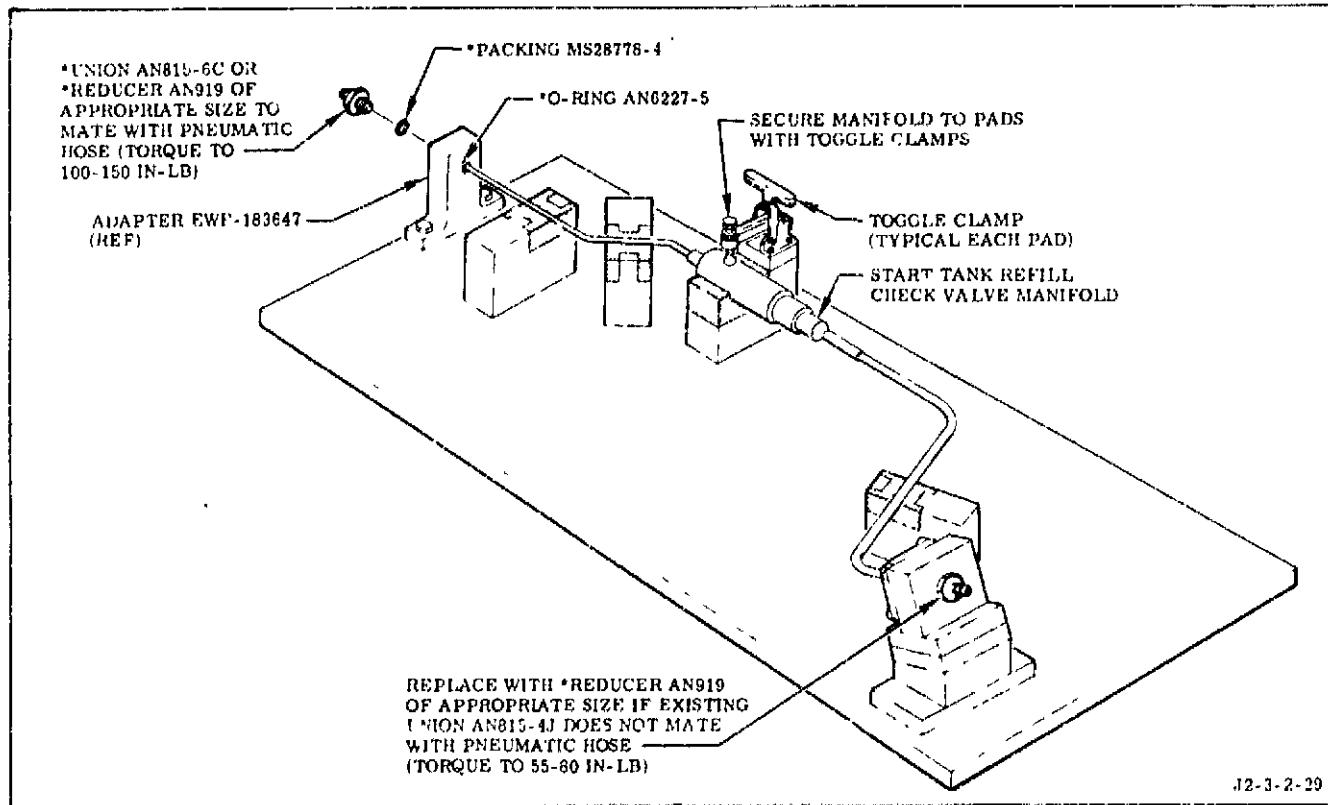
GSE Setup for Start Tank Refill Check Valve Manifold
